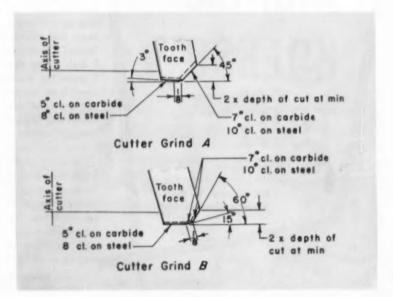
(right) Two modified designs of carbide insert blades for face-milling cutters. Both blades have axial rake of 6 deg and radial rake of -6 deg, but Grind B has considerably longer life.
